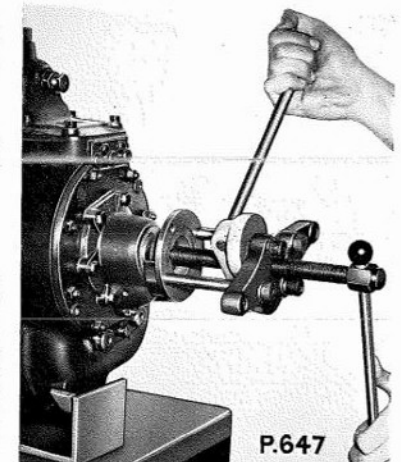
Withdrawing a tight driver coupling using Churchill Tool 55, Legs R.G.55-8 and Adaptor Set R.G.55-10
